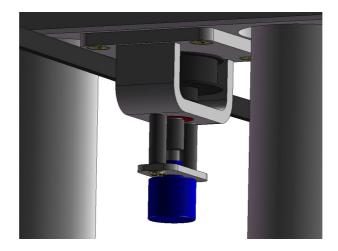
3D model of the assembly of the Horizontal Pulley Holder and other components.
